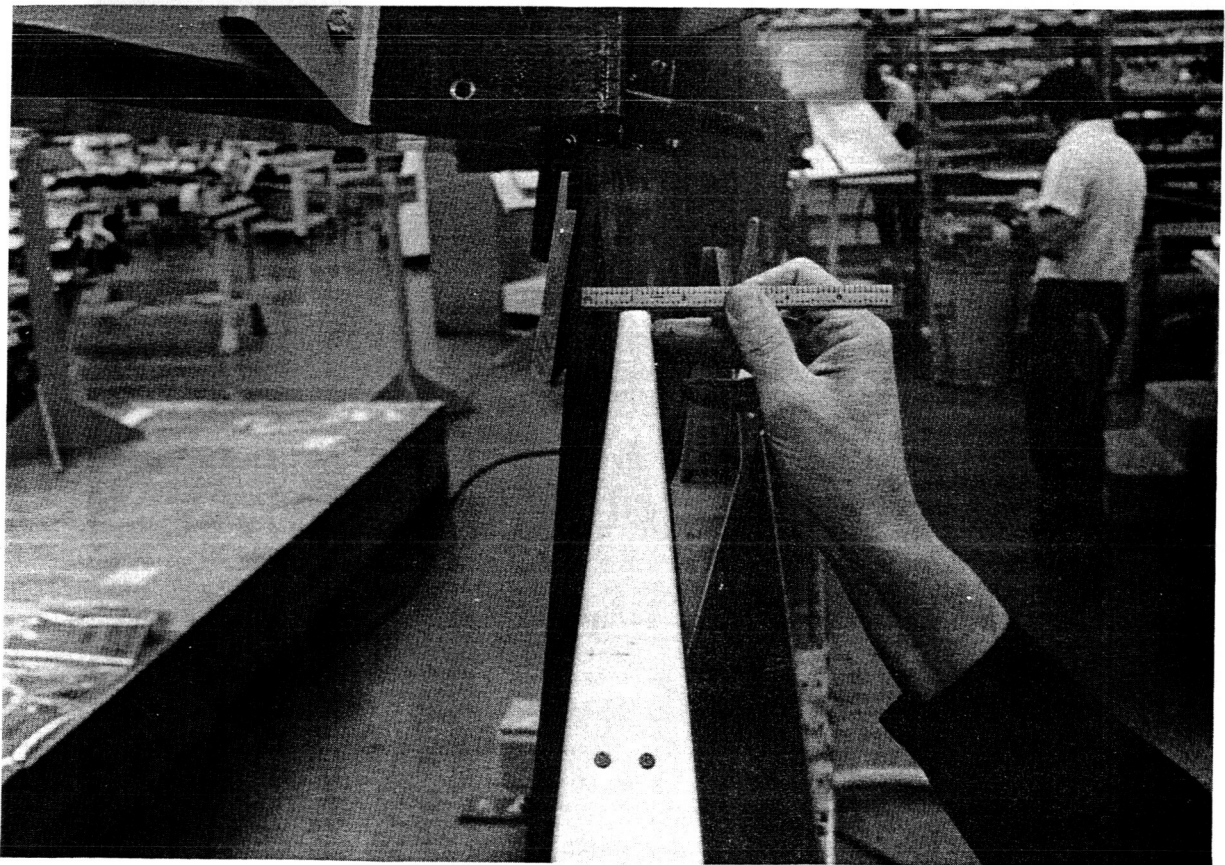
Lower Skin Panel Showing Warp at Inboard End
